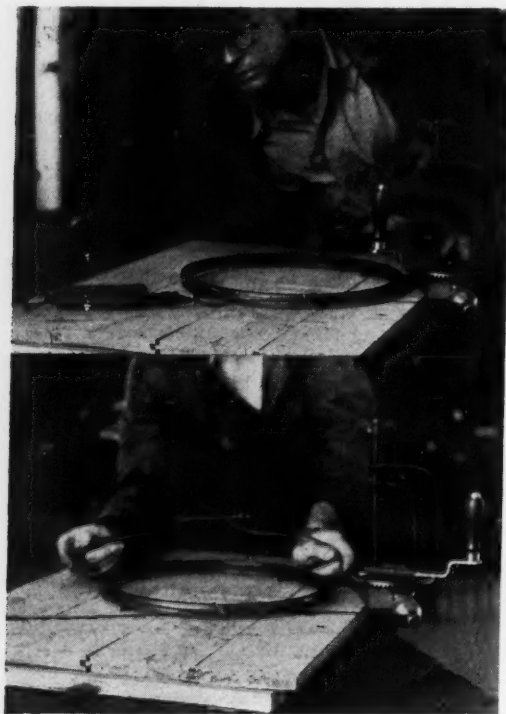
(Above)—Using a breast drill to compress a large gas engine piston ring so that the tension could be gaged. Fig. 2 (Below)—To cut down the flutter of ring ends in service, the diameter of the ring, closed to provide a gap of the correct width, must be less than that through the properly closed gap. This "plus circularity" varies with the diameter and thickness of the ring.
